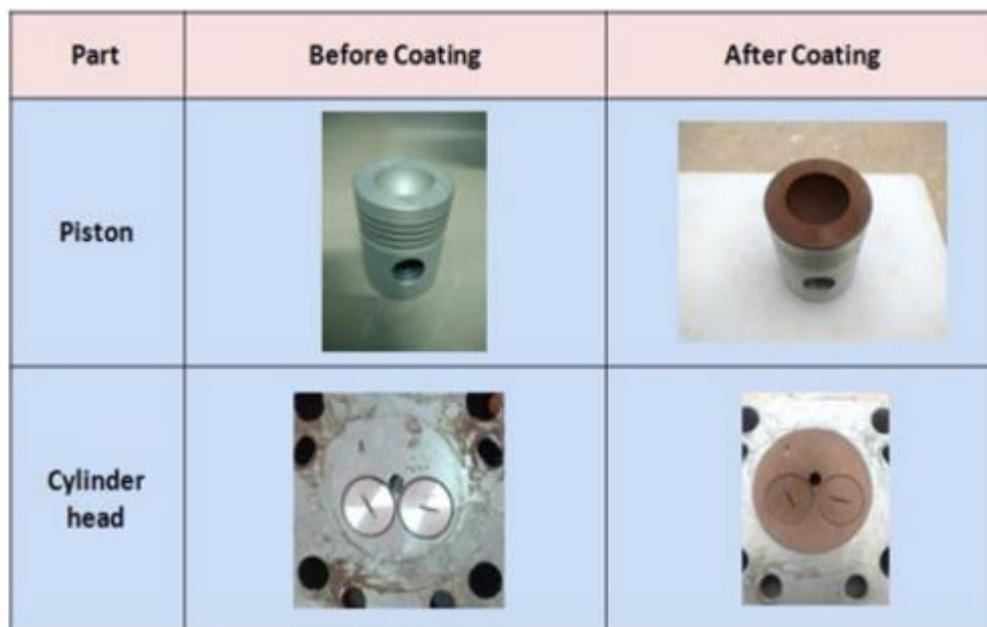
Piston, and Combustion chamber coated by plasma coating technique [24]
